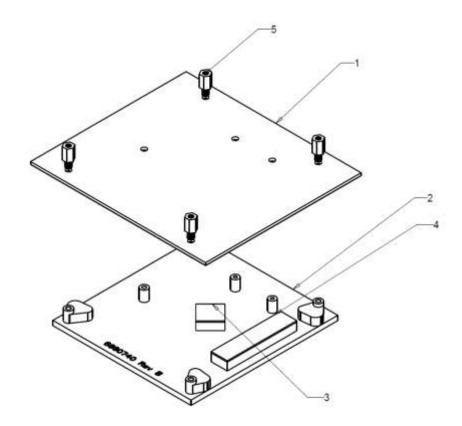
Mechanical Drawing of the Heat Spreader (Top View)
